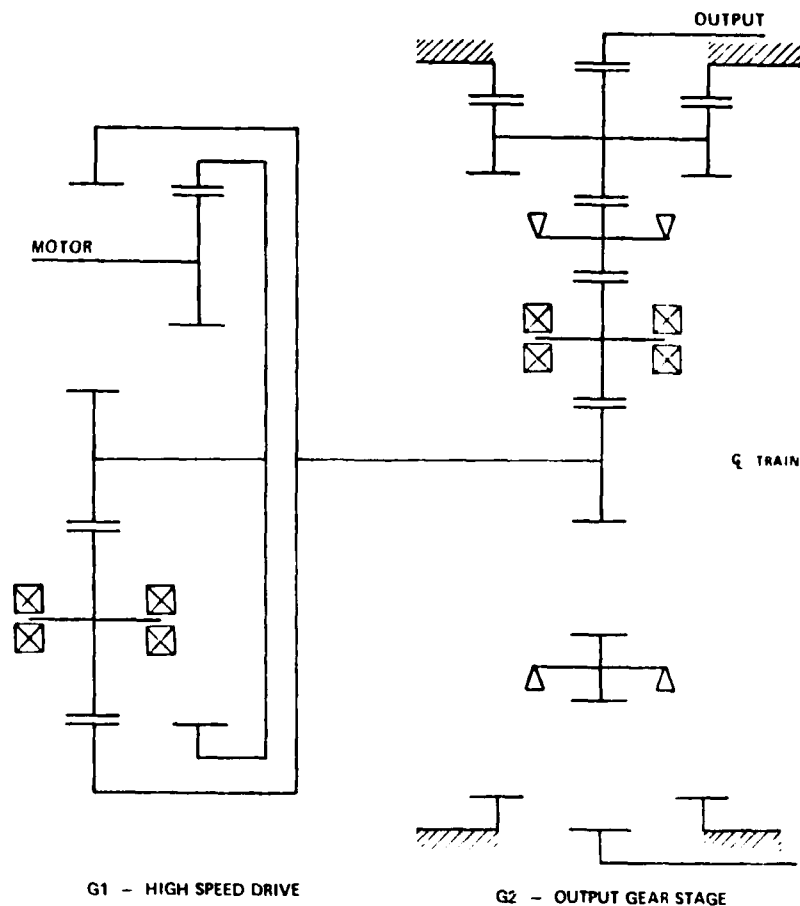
SHOULDER JOINT GEAR SCHEMATIC
